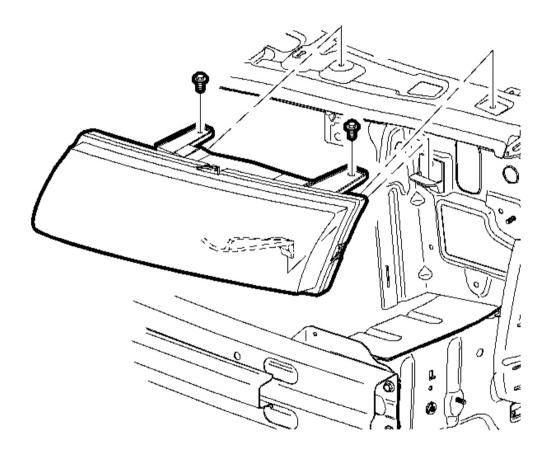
View Of Headlamp Assembly or Headlamp Bulb & or Cornering, Sidemarker, Park, Turn Signal Bulb Courtesy of GENERAL MOTORS CORP.
